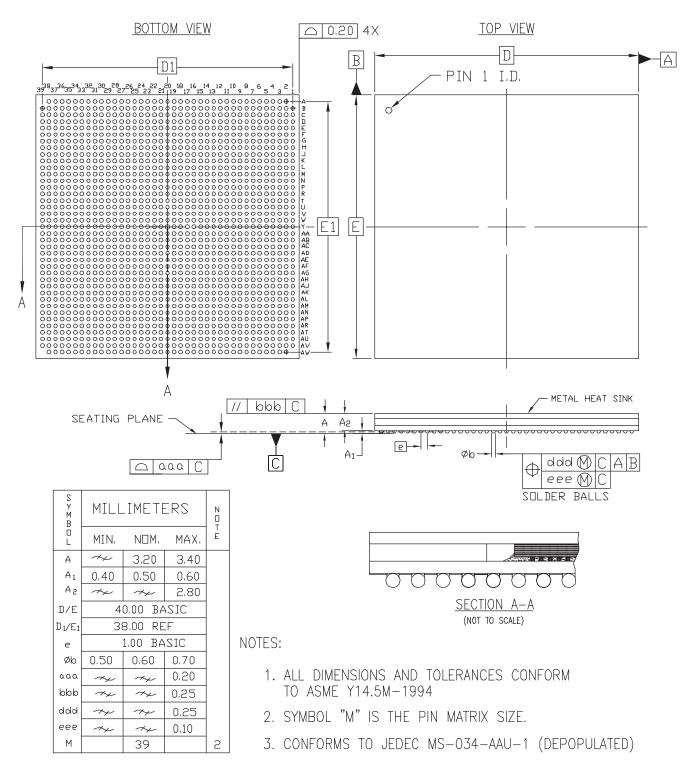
FF1517 Flip-Chip Fine-Pitch BGA Package
